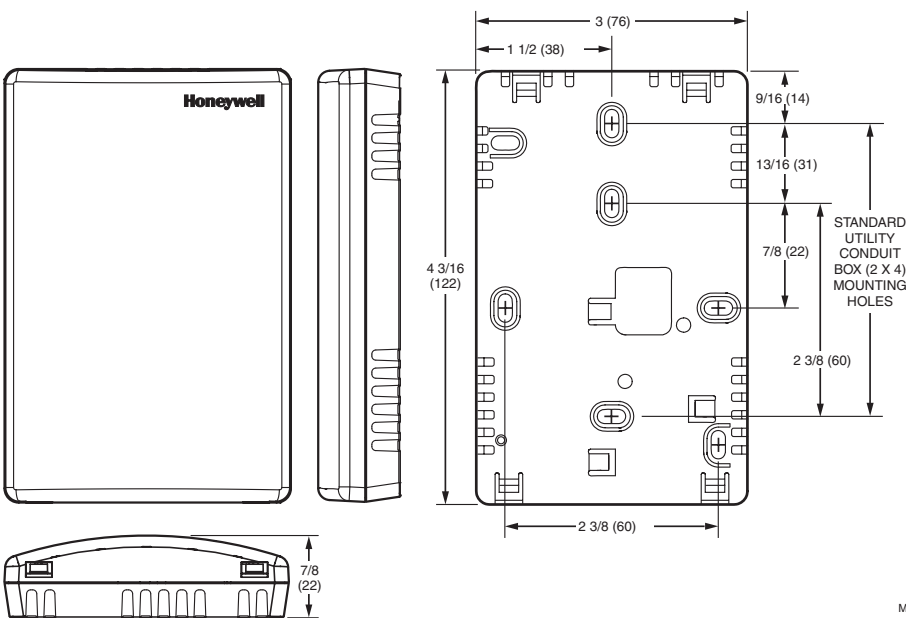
Wall-mount Sensor Dimensions in In (mm).
